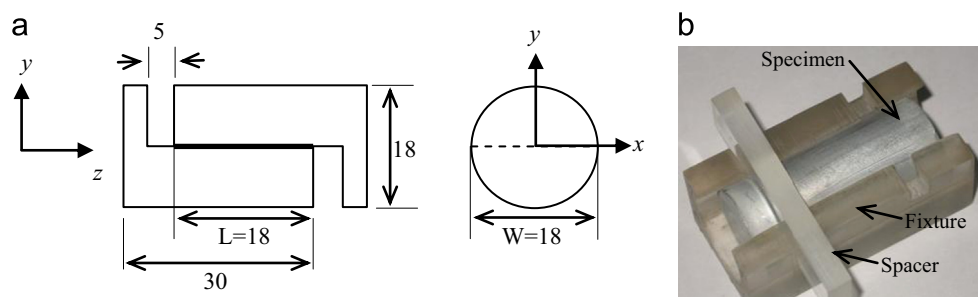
(a) Specimen geometry (all dimensions in mm), (b) assembled specimen in fixture.
